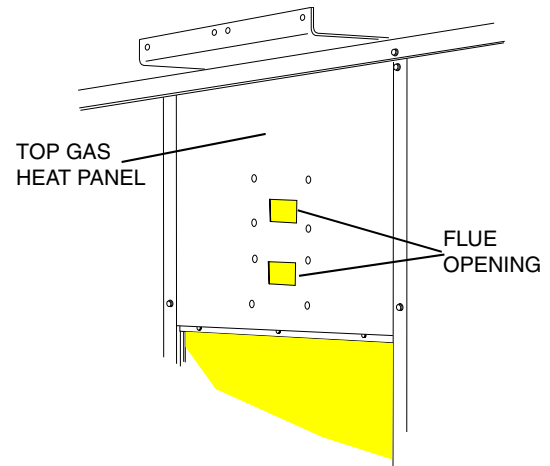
INSTALLED TOP GAS HEAT PANEL
